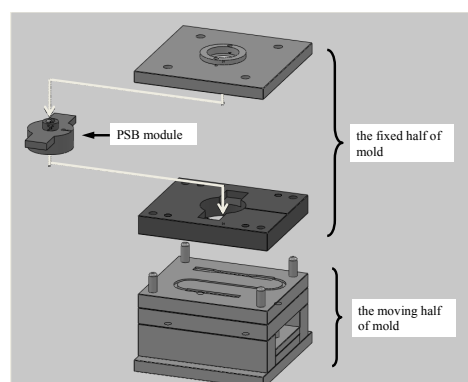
Schematic illustration of assembly procedure for the PSB module in the fixed half of the mold
